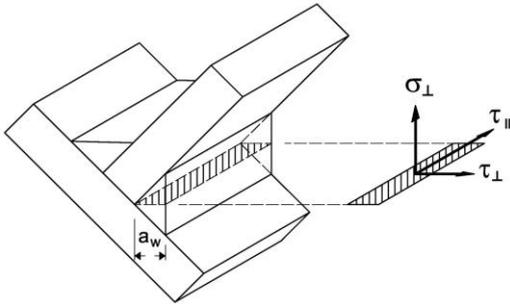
Stress components longitudinal and perpendicular to the weld throat
